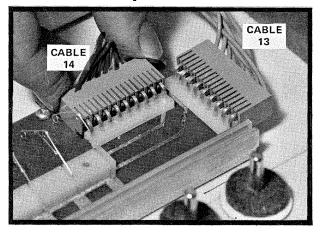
Connect Cable #14 to the Treble Key Switch Board.
